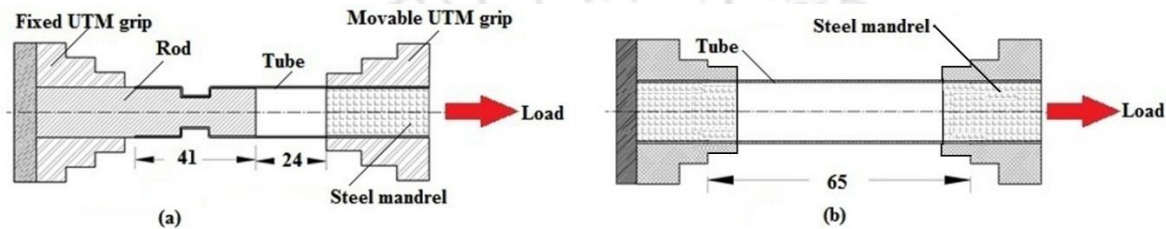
Pull-out testing condition for (a) crimped sample and (b) tube (All dimensions are in mm)
